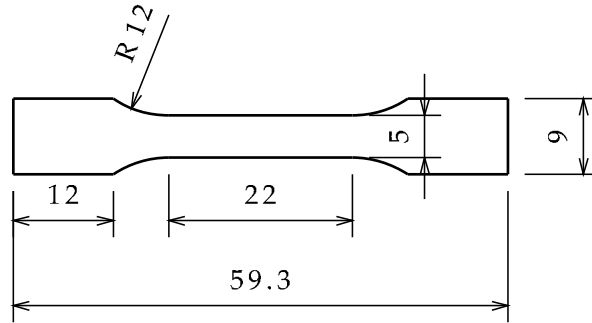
Technical drawing of the tensile specimen dimensions (unit: mm) used in the study.
